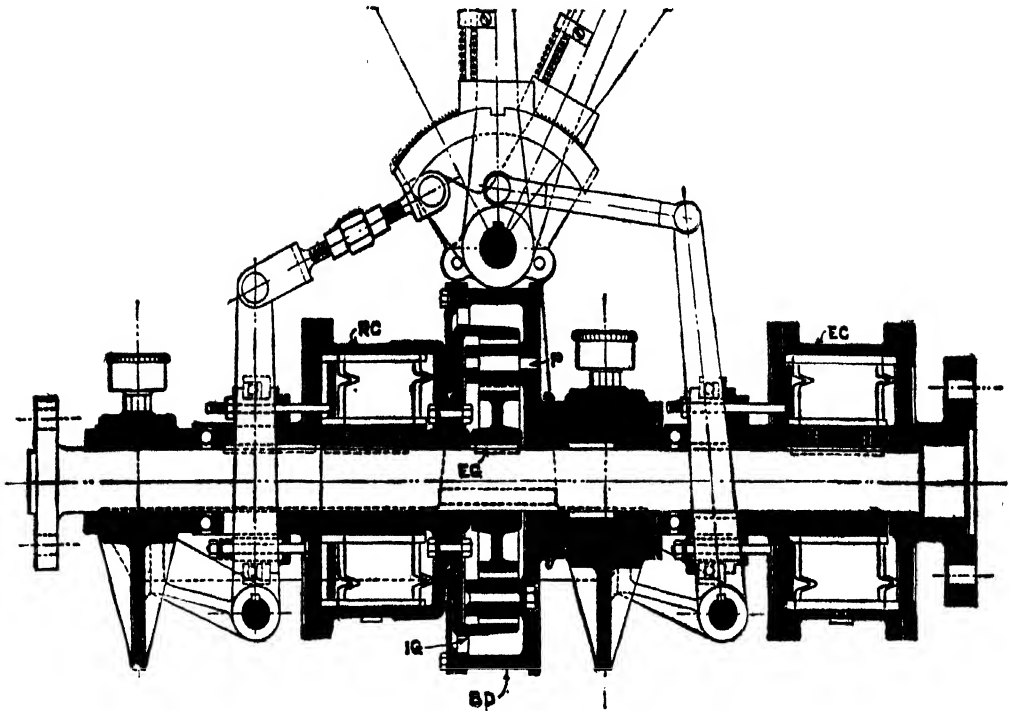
Helé-Shaw grooved plate-clutch reversing gear.
